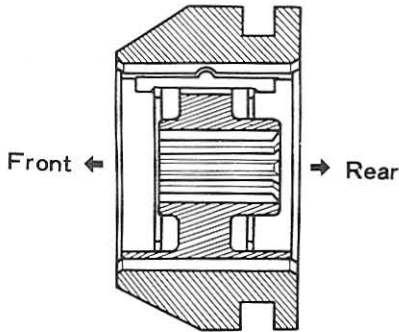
Clutch Hub & G2432 Hub Sleeve Direction
